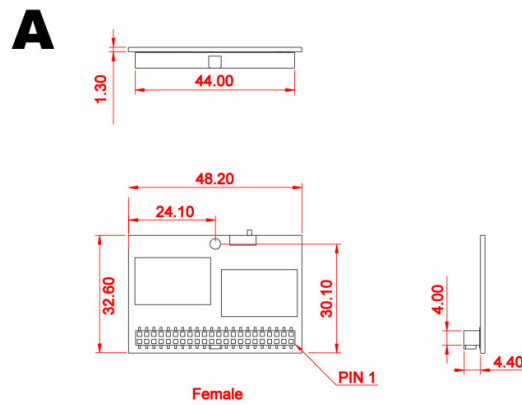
Mechanical Dimension of EDC4000 44-pin (Horizontal Female Type B)
